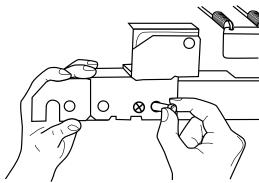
FIGURE I - ATTACHING FOUR-INCH EXTENSION TO FOOT SPRING CENTER ANGLE
